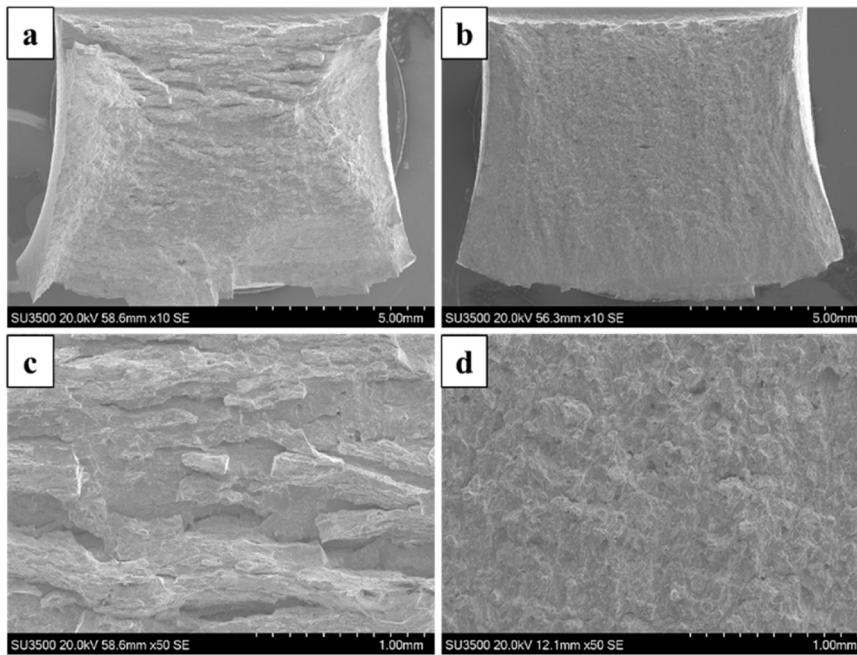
Charpy impact fracture surfaces for PBF-LB/M SS316L samples manufactured with 2 sieves powder a) SRHT fracture surface, b) HIP fracture surface, c) faceted features on the SRHT fracture surface, d) cracking, pores on the HIP fracture surface.
